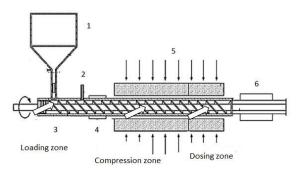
Hardware design of extrusion technology (Wuxi AJMS Filter Machinery Co., Ltd., China) for receiving carbon block cartridge
